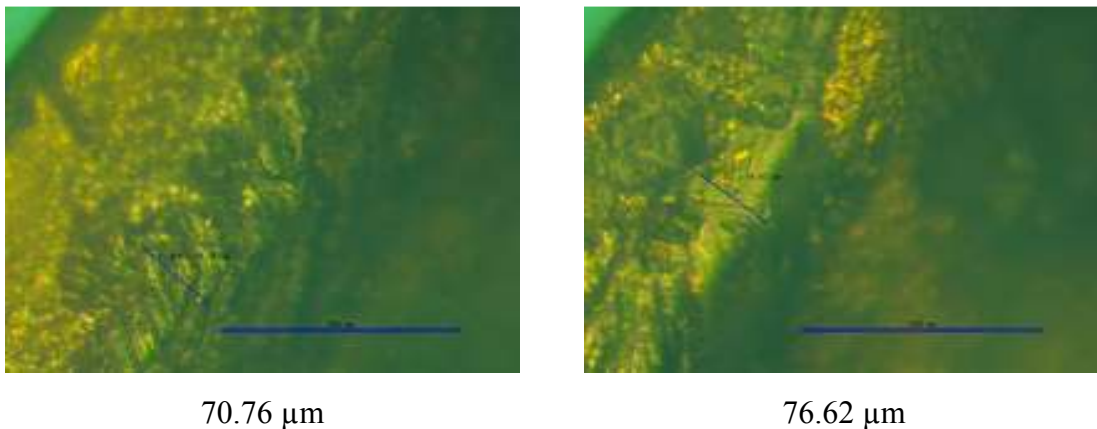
Crater wear on cutting tool with medium cutting speed condition
